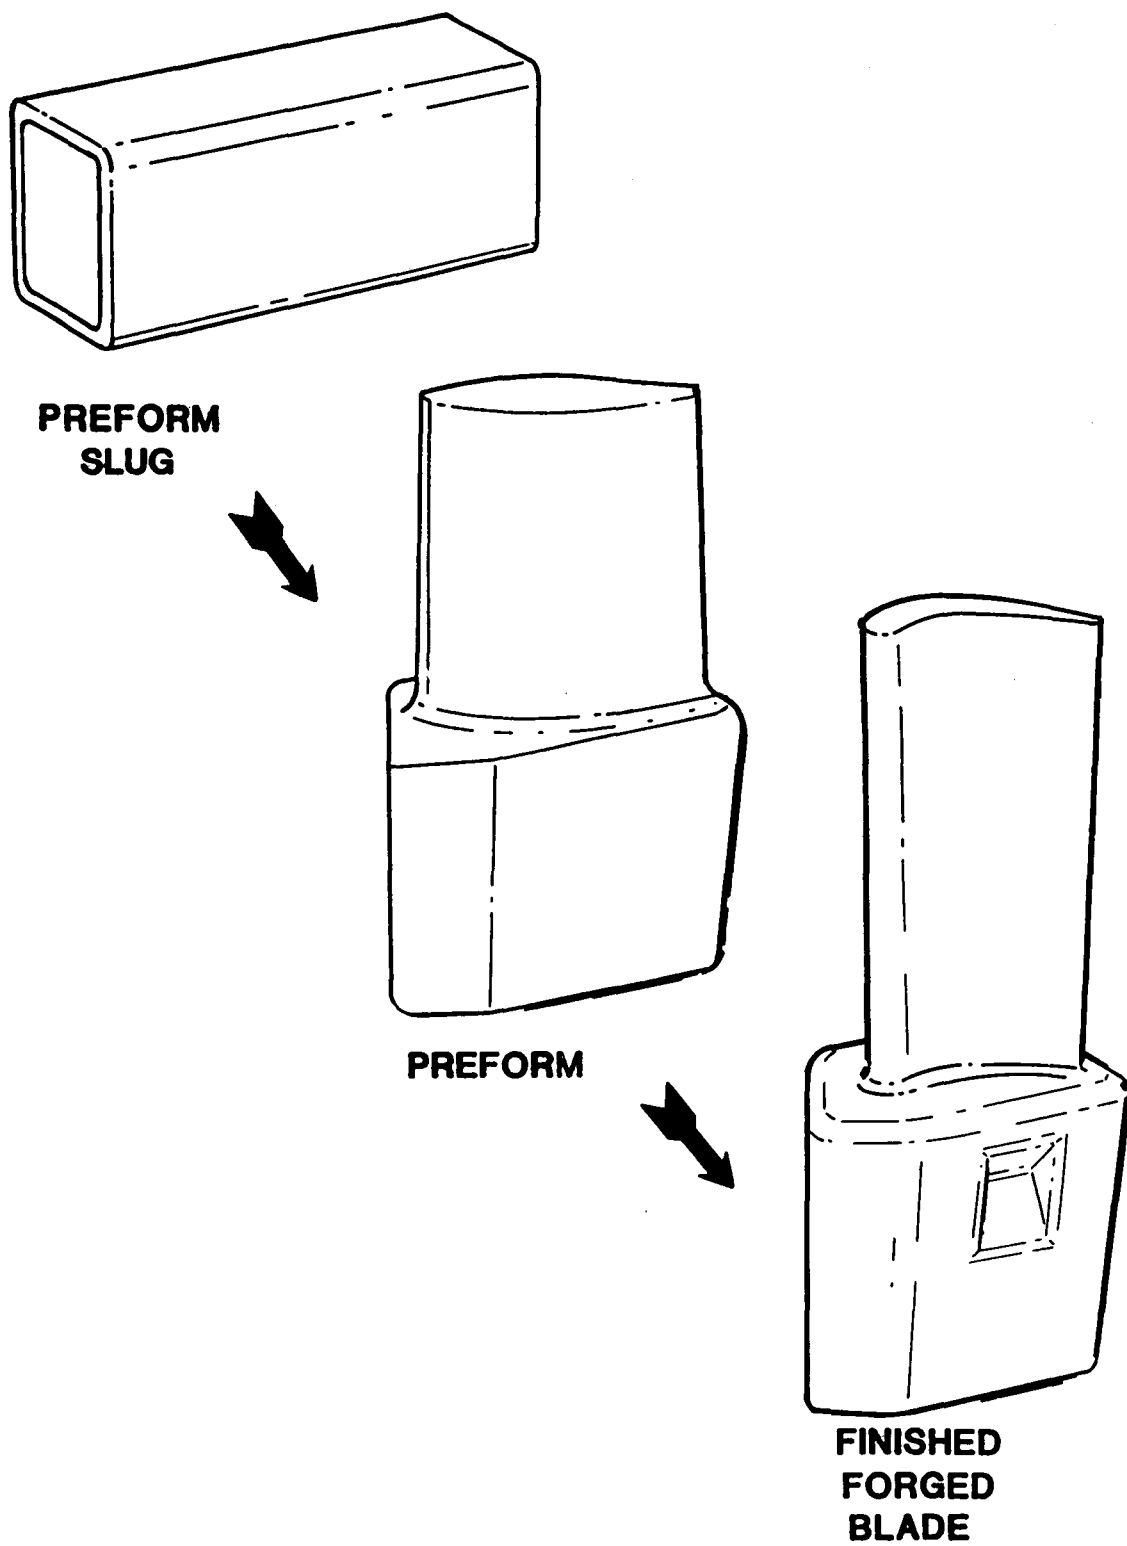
Forging Sequence Sketch for MA-6000 Blade Forging Task.
